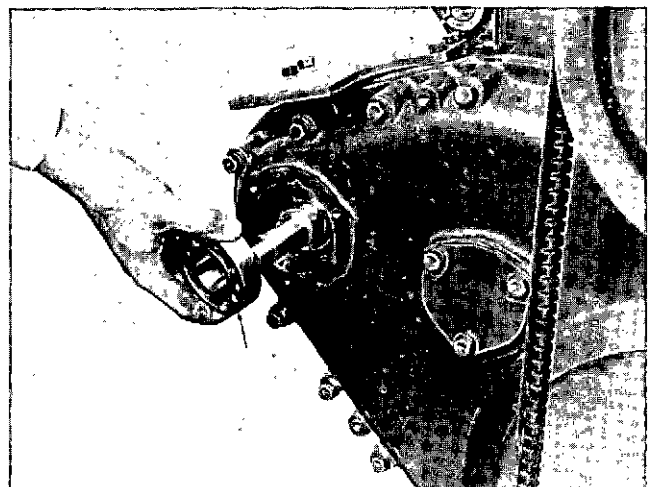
, V414152. Install auxiliary drive bearing
